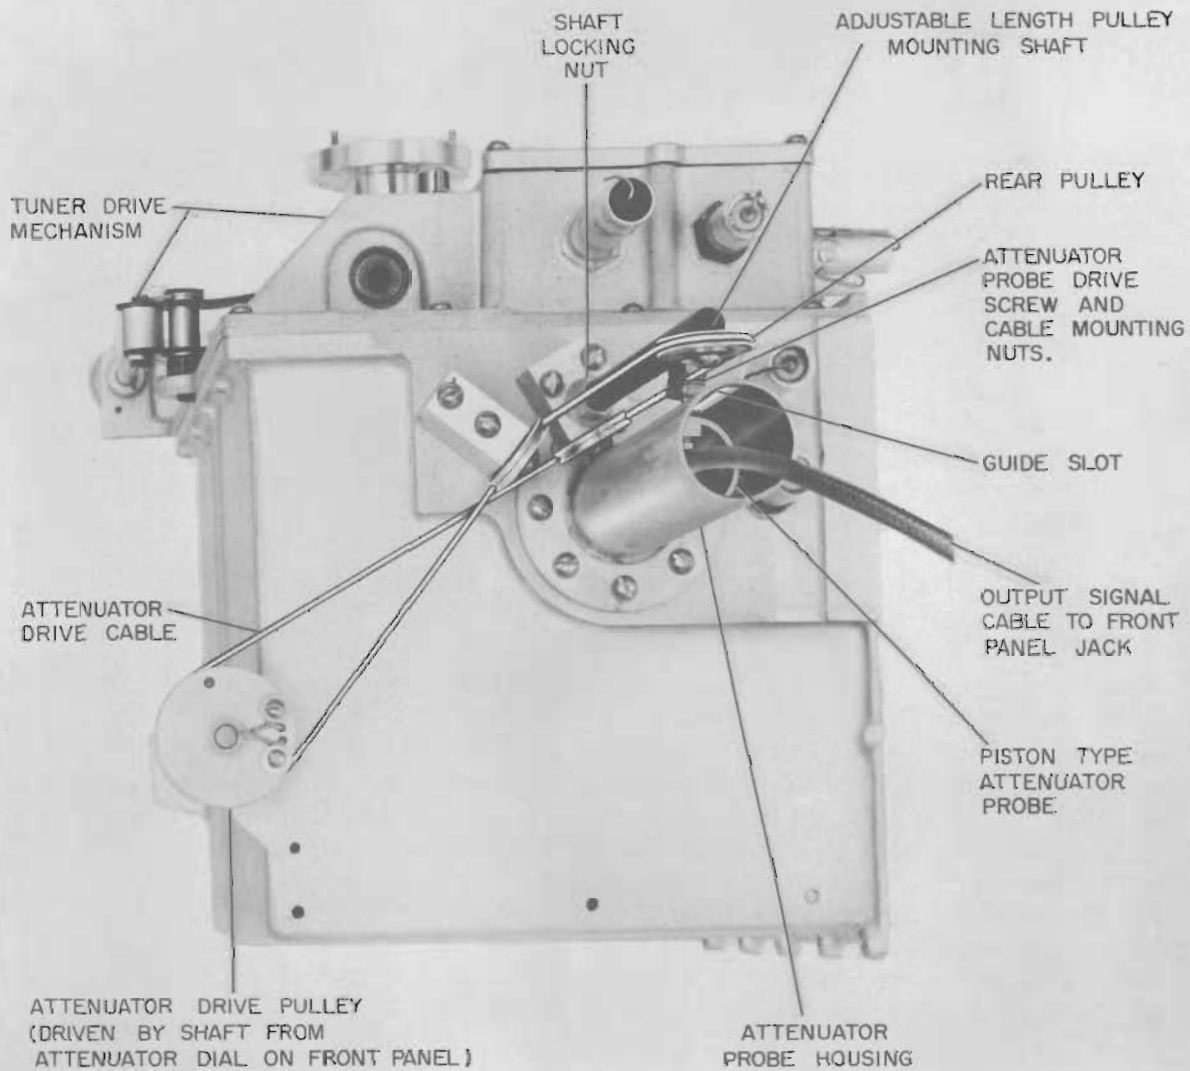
R-F Generator Assembly Rear View, Showing Output Attenuator Drive System.
